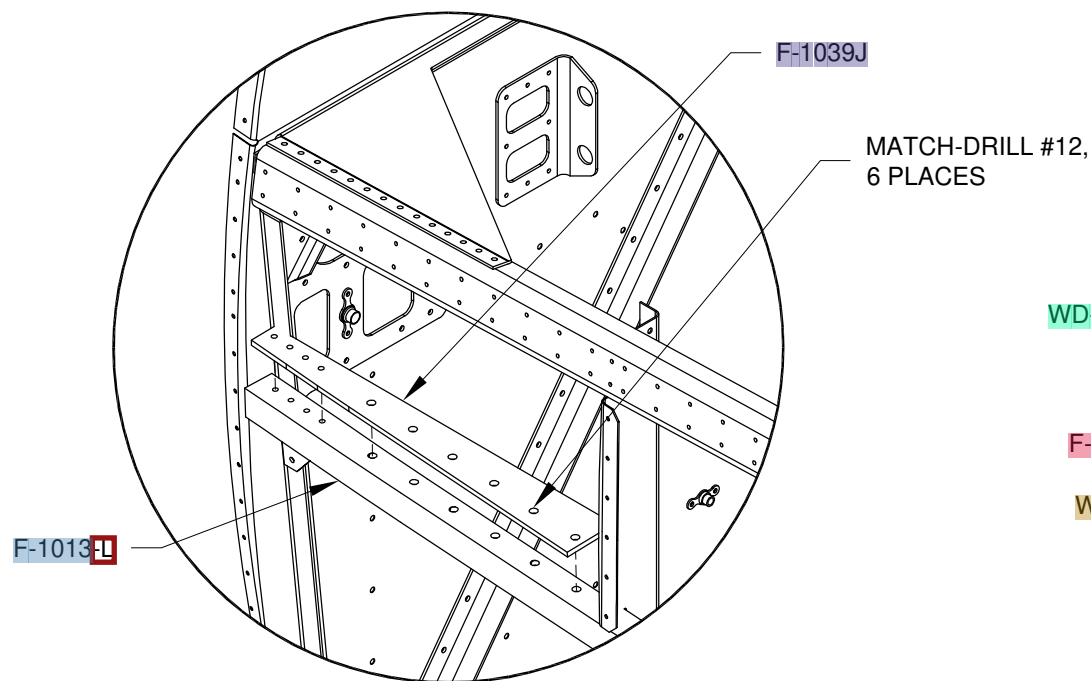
DRILLING THE RUDDER PEDAL ATTACH HOLES
